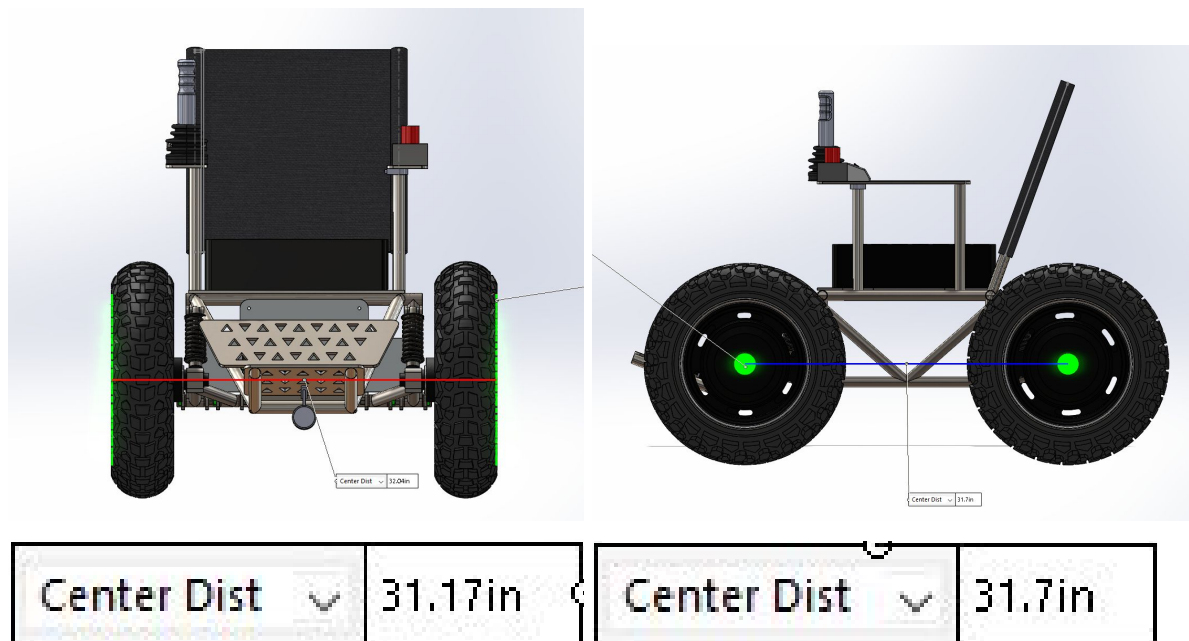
Front and Side view of wheelchair dimensions from CAD mockup. The finalized dimensions of the wheelchair with our chosen wheels will fit on Jason's lift, as they both fall within our desired range.
